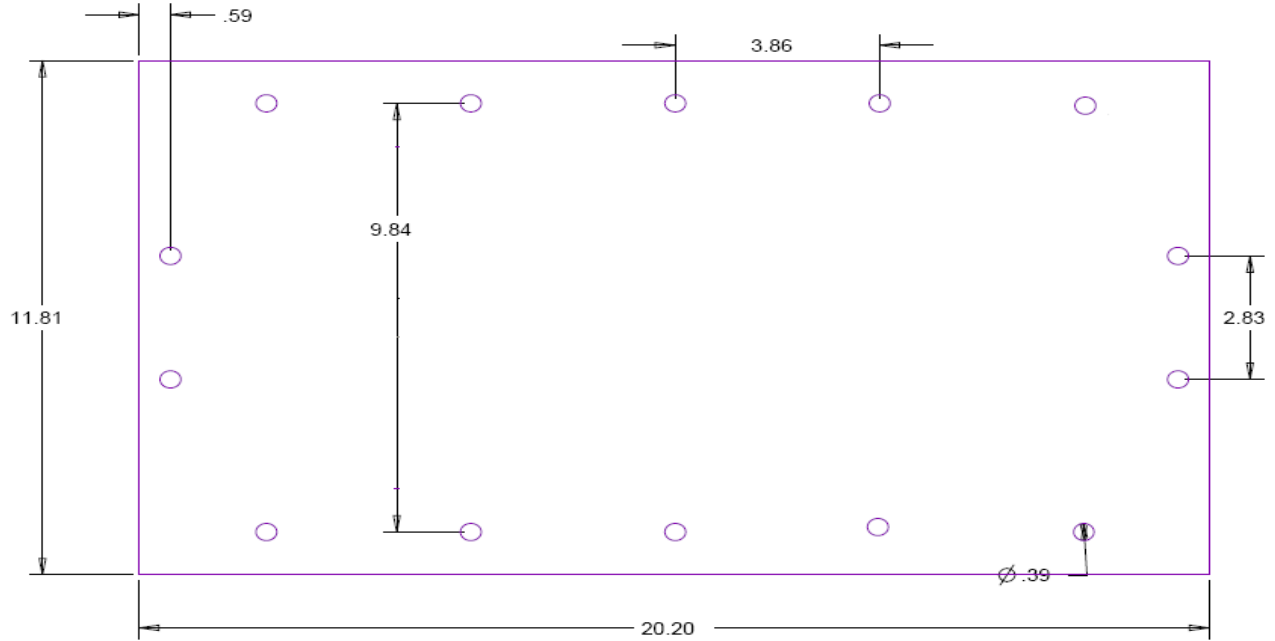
Polycarbonate plates that were used to seal the two silicone parts. Designed in Pro Engineer. Dimensions expressed in inches.
